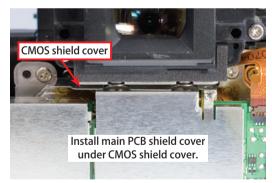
Soldering Position for the Main PCB Shield Cover (Top)
